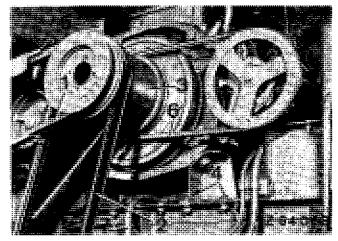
Removing Various Engine Connections Near Drive Pulley (942 Shown)
